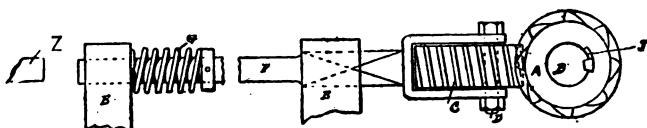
Roots' Reversible Valve-opening Mechanism for Petroleum or Explosive Engines.
